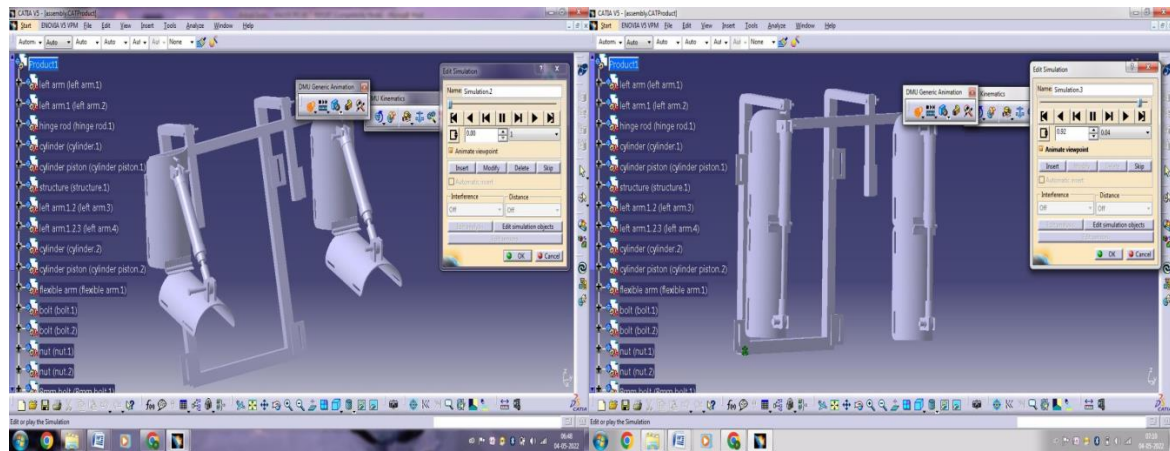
Kinematic assembly at 90° fold Fig 4. Kinematic assembly at unfolded limbs
